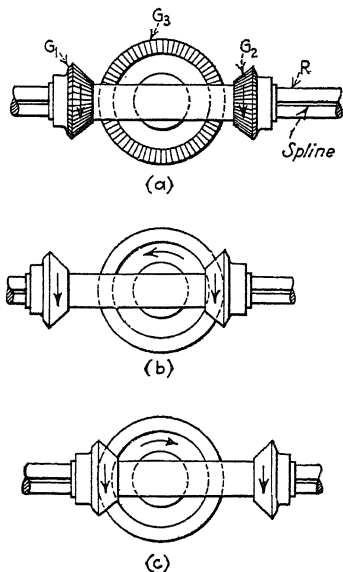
Bevel-gear reverse. The bevel pinions  $G_1$  and  $G_2$  are fastened to a sleeve which is feathered on the rod or shaft,  $R$ . Gear  $G_3$  is the gear to be driven. In *a* neither bevel pinion is engaged. Moving a lever (3, Fig. 33) will move  $G_2$  to engage  $G_3$  and cause  $G_3$  to revolve in the direction shown in *b*. Moving the lever all the way in the opposite direction will move  $G_2$  out of mesh and engage  $G_1$  with  $G_3$  which will reverse the direction of  $G_3$  as shown in *c*. NOTE: If  $G_3$  were the driving gear and revolved always in the same direction, then the shaft or rod  $R$  would be the driven member and its direction would be determined by whether  $G_1$  or  $G_2$  was engaged with  $G_3$ .
